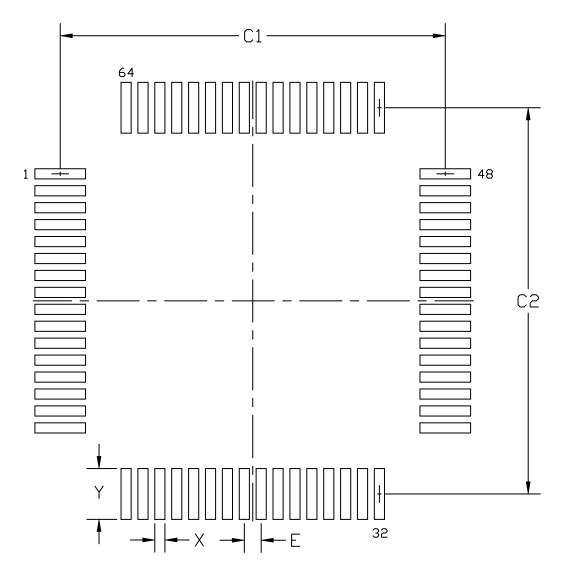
TQFP64 PCB Land Pattern Drawing
